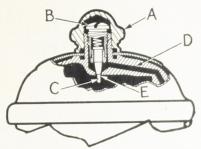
SECTIONAL VIEW OF TOP OF VALVE
